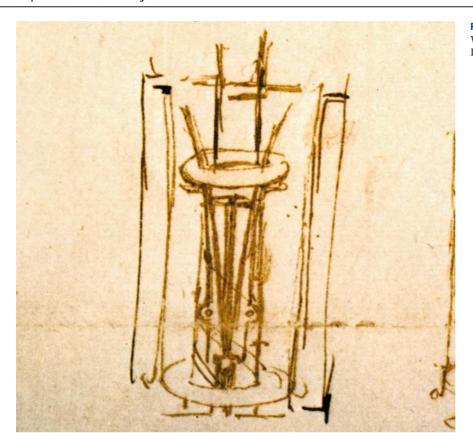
Windsor, RL 12282 v K/P 125 r. Actuator/valve assembly
